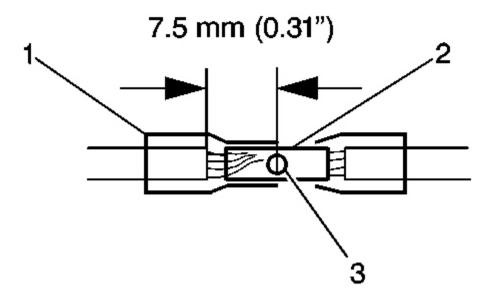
Identifying Durasteel Splice Sleeve Courtesy of GENERAL MOTORS CORP.
